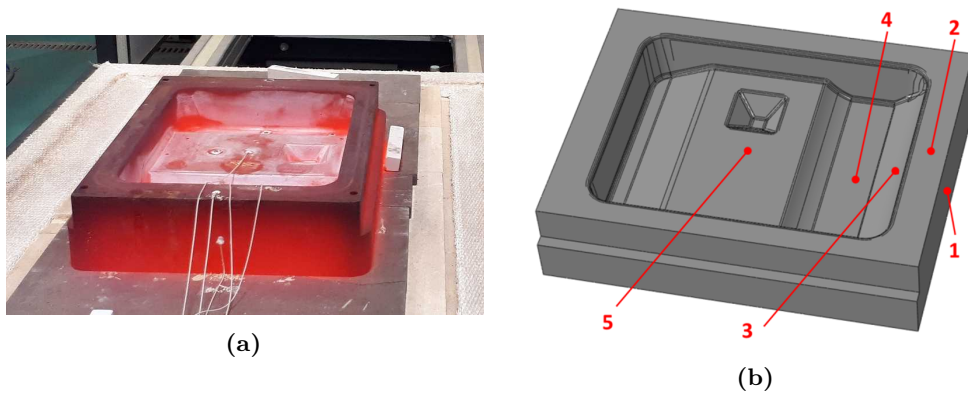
Mold experiment: (a) picture at high temperature, (b) CAD view with the thermocouple positions
